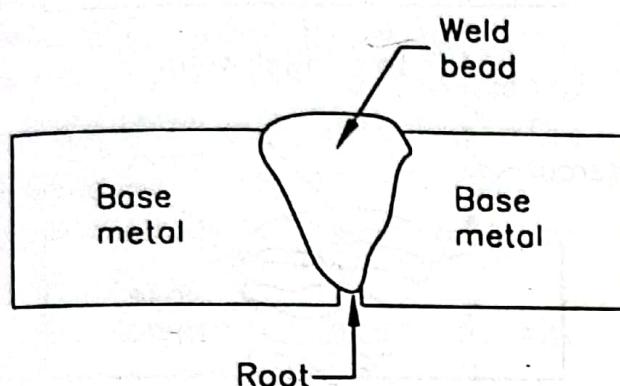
Incomplete penetration at the root of a Butt weld.
